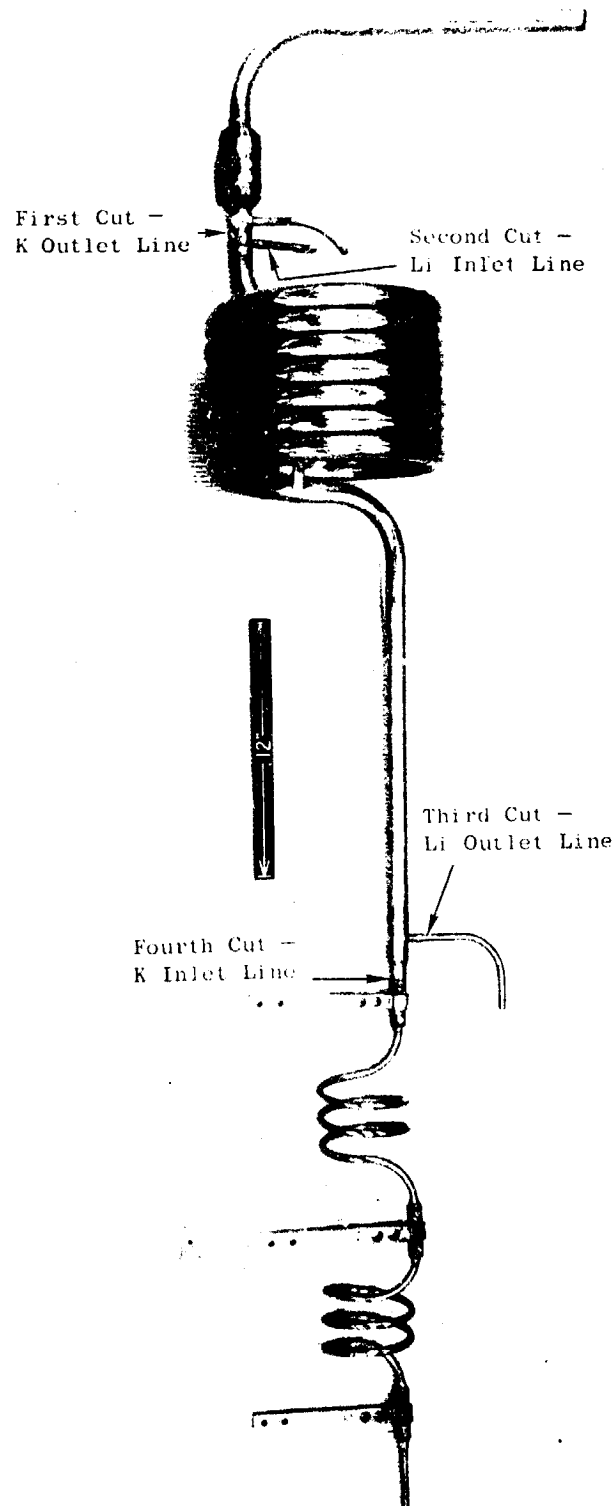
Location of Tubing Cuts Made to Remove Boiler From Loop as Indicated on the Boiler Assembly Before Final Loop Assembly. (Orig. C67100412)
